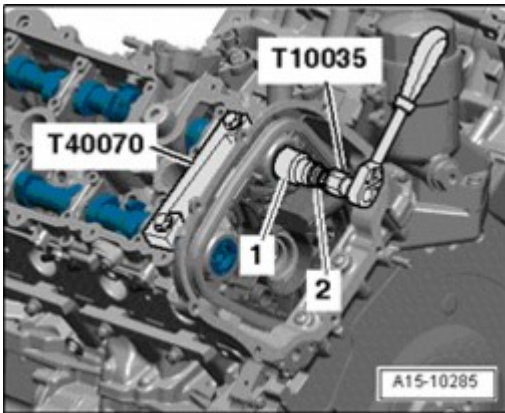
Rotating Intake Camshaft To "TDC" And Tightening Camshaft Adjuster Screw On Camshaft With A Socket SW 24 Inserted Between
